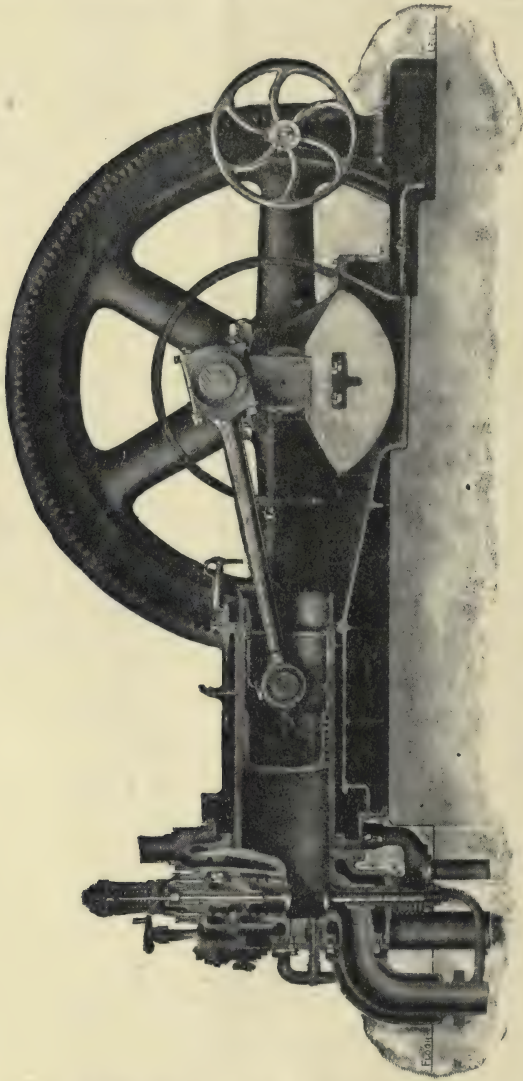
Single-cylinder, single-acting, horizontal gas engine (Crossley).
